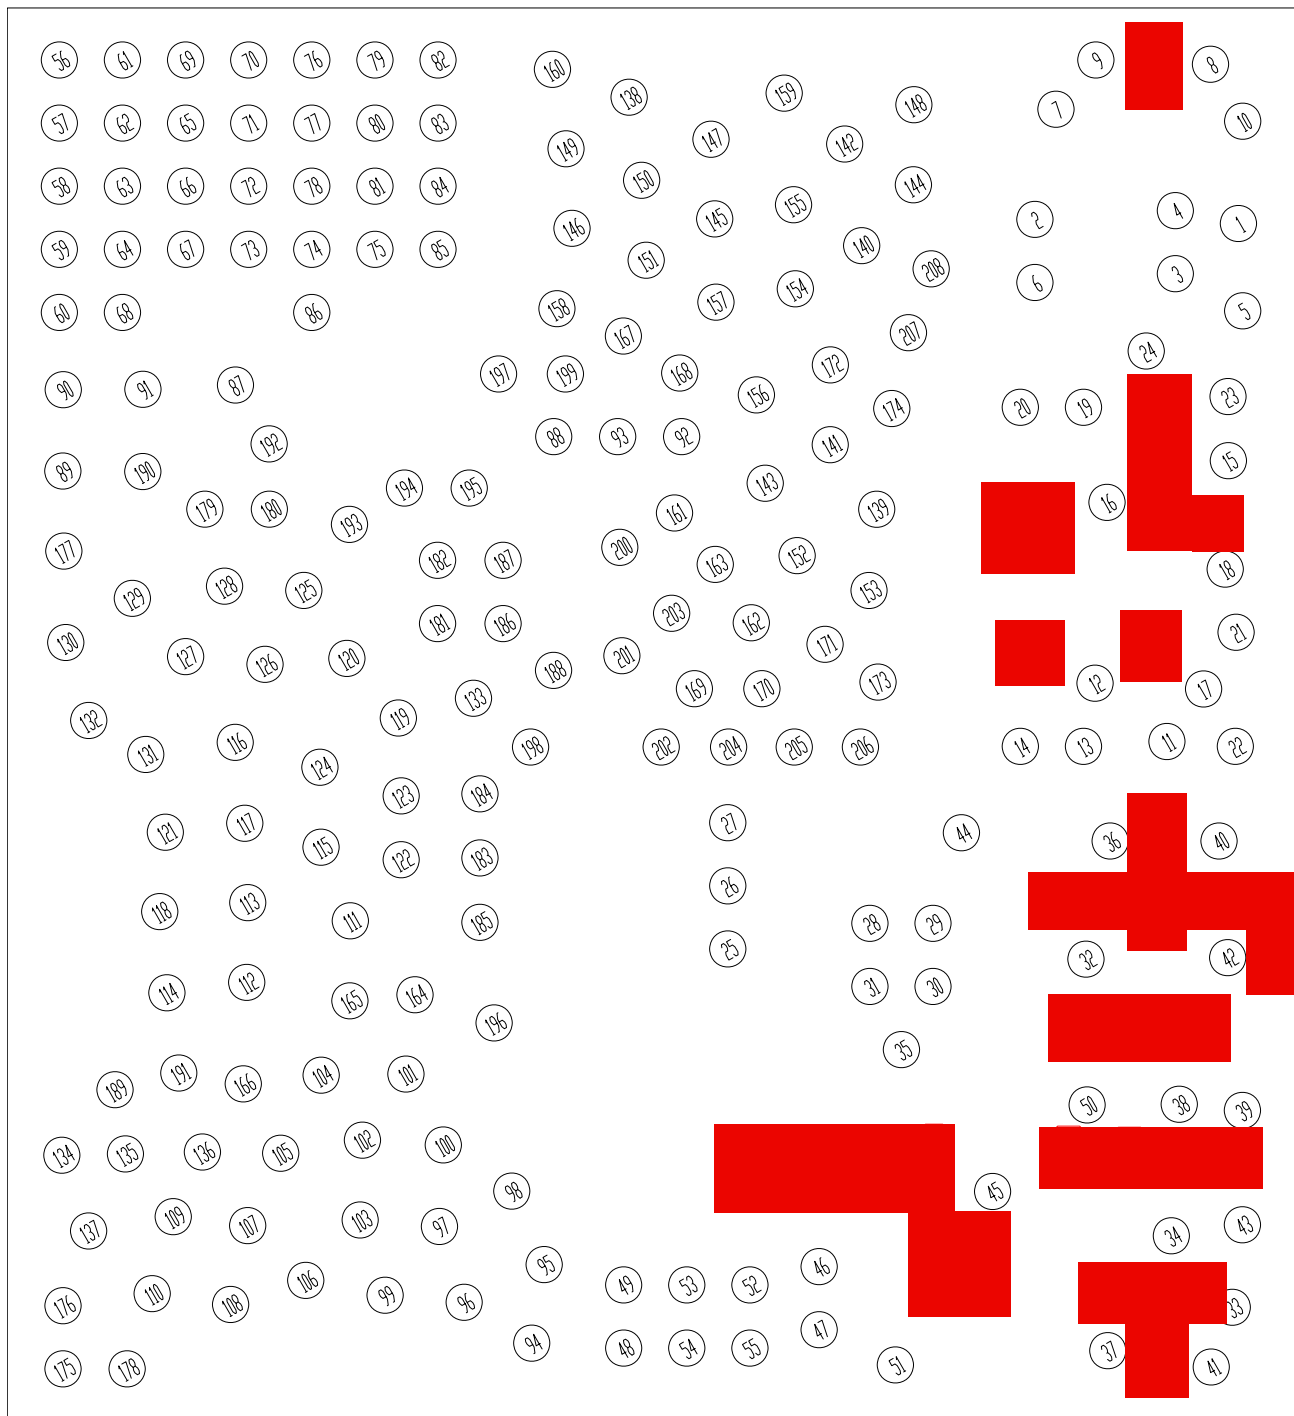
WLCSP Keep-Out Areas for PCB Layout — Bottom View with Bumps Facing Up
